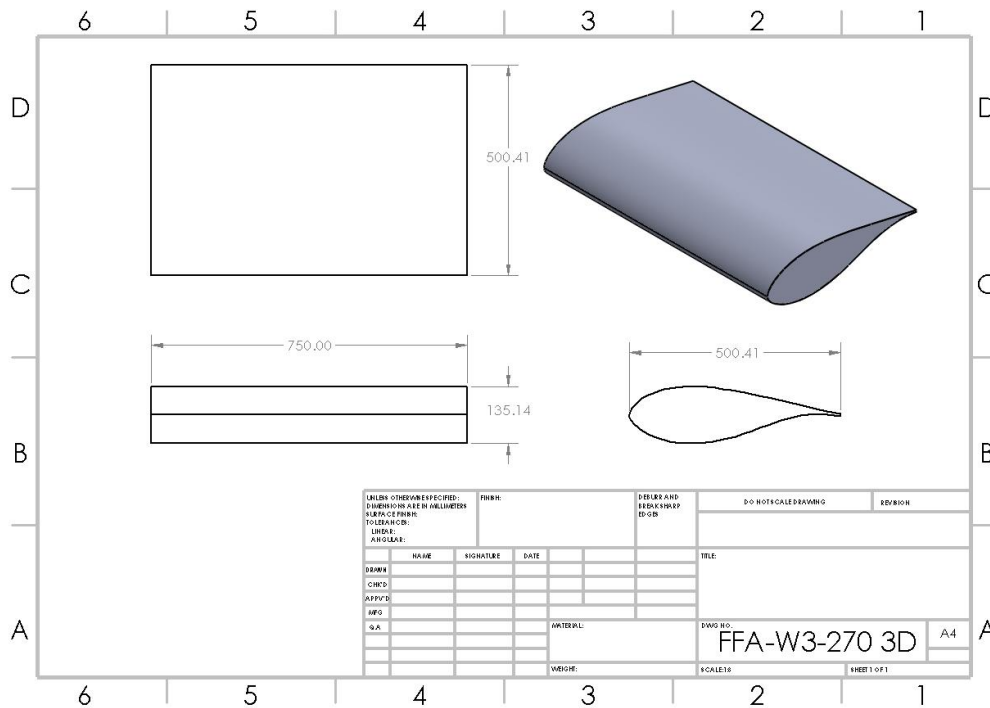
Technical drawing of FFA-W3-270 aerofoil
